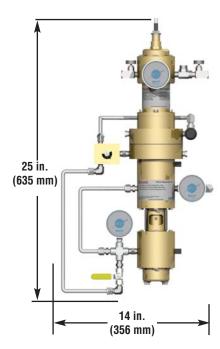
Overall dimensions of Becker Model VRP-600-SB-PID-40 Controller (Direct Acting)
